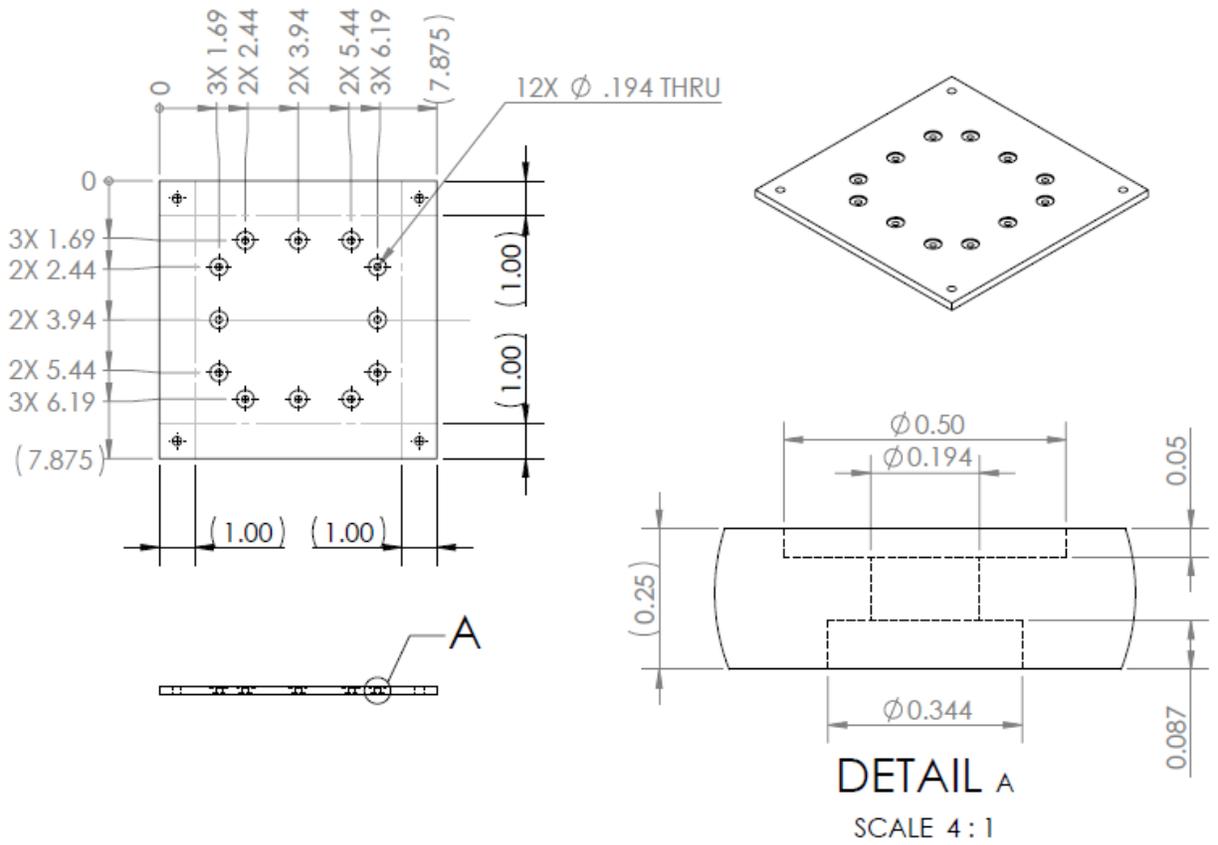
Dimensioned Drawing of Modified Payload Mounting Plate
